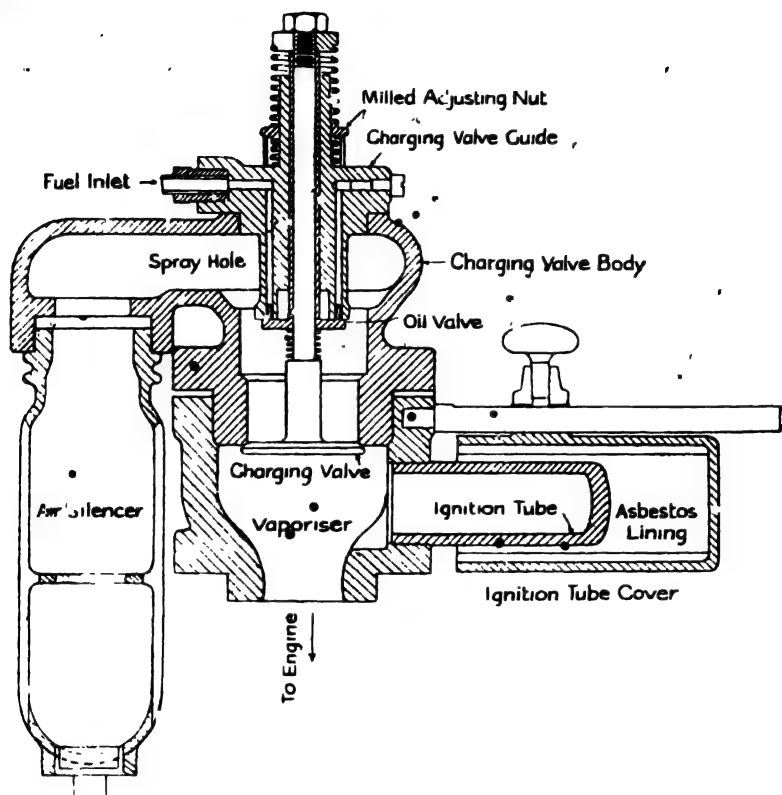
Sectional View of Vaporizer and Charging Valve, Crossley Engine
